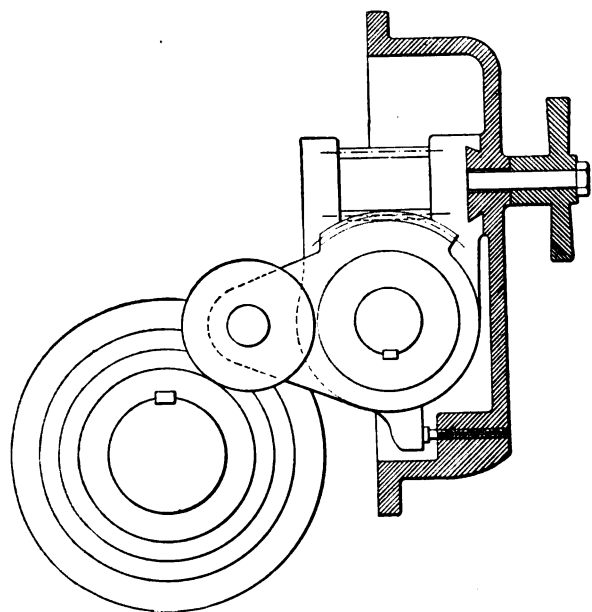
HEAVY-DUTY TUMBLER GEAR ARRANGEMENT
